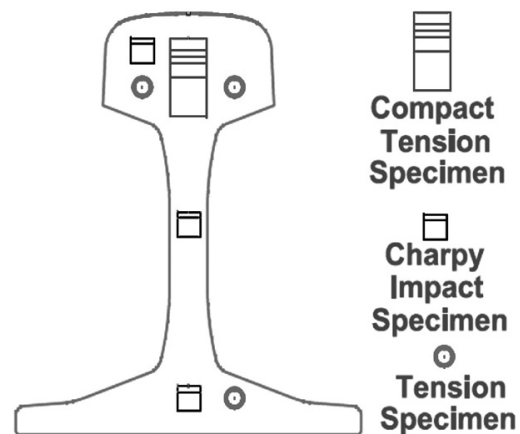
The position of Tensile, Charpy Impact and Compact Tension Specimens in the Rail Welding Zone.
